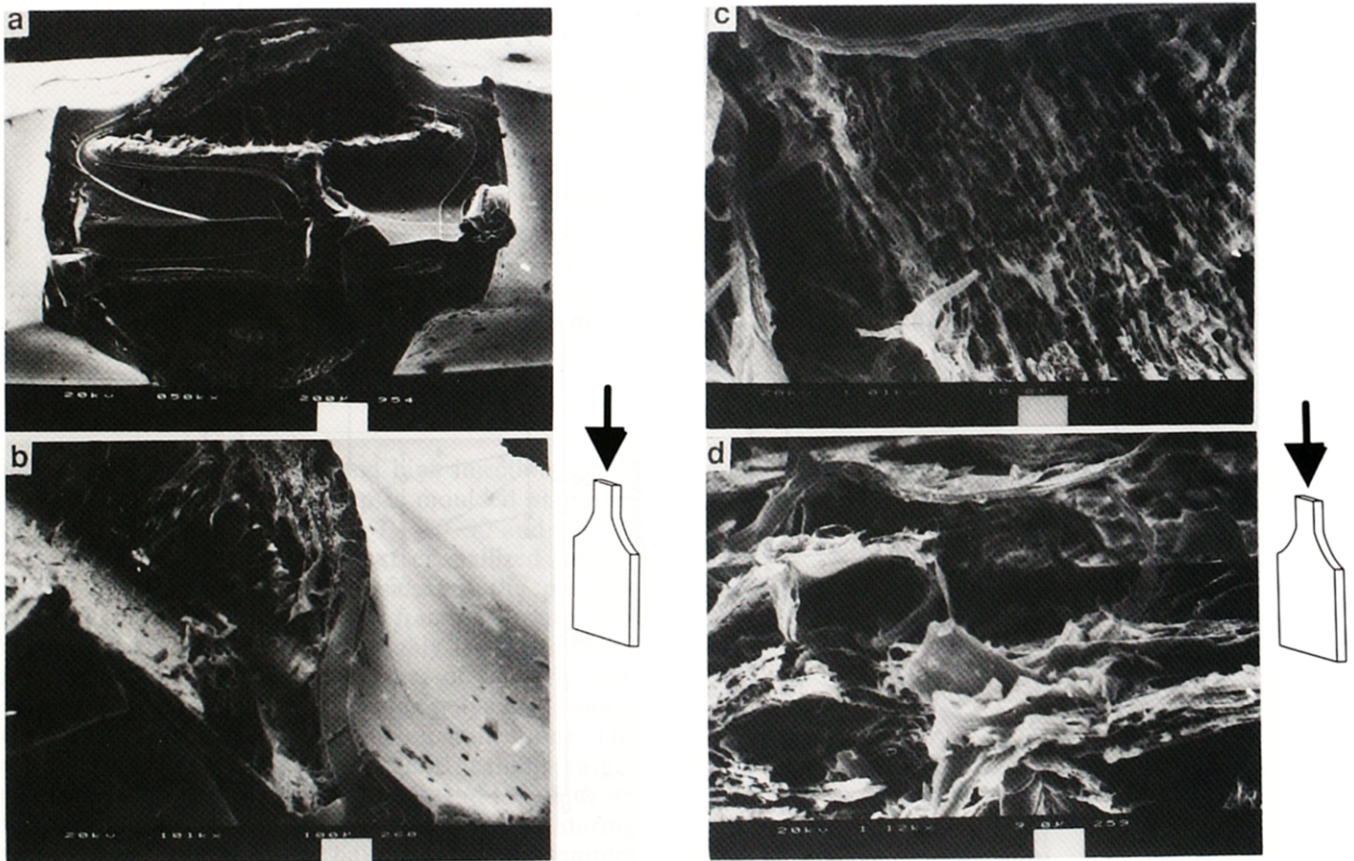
SEM photomicrographs of the fracture surface of samples after tensile testing. Sample moulded at 90°C using the high injection speed. (a)-(d) Increasing magnification
